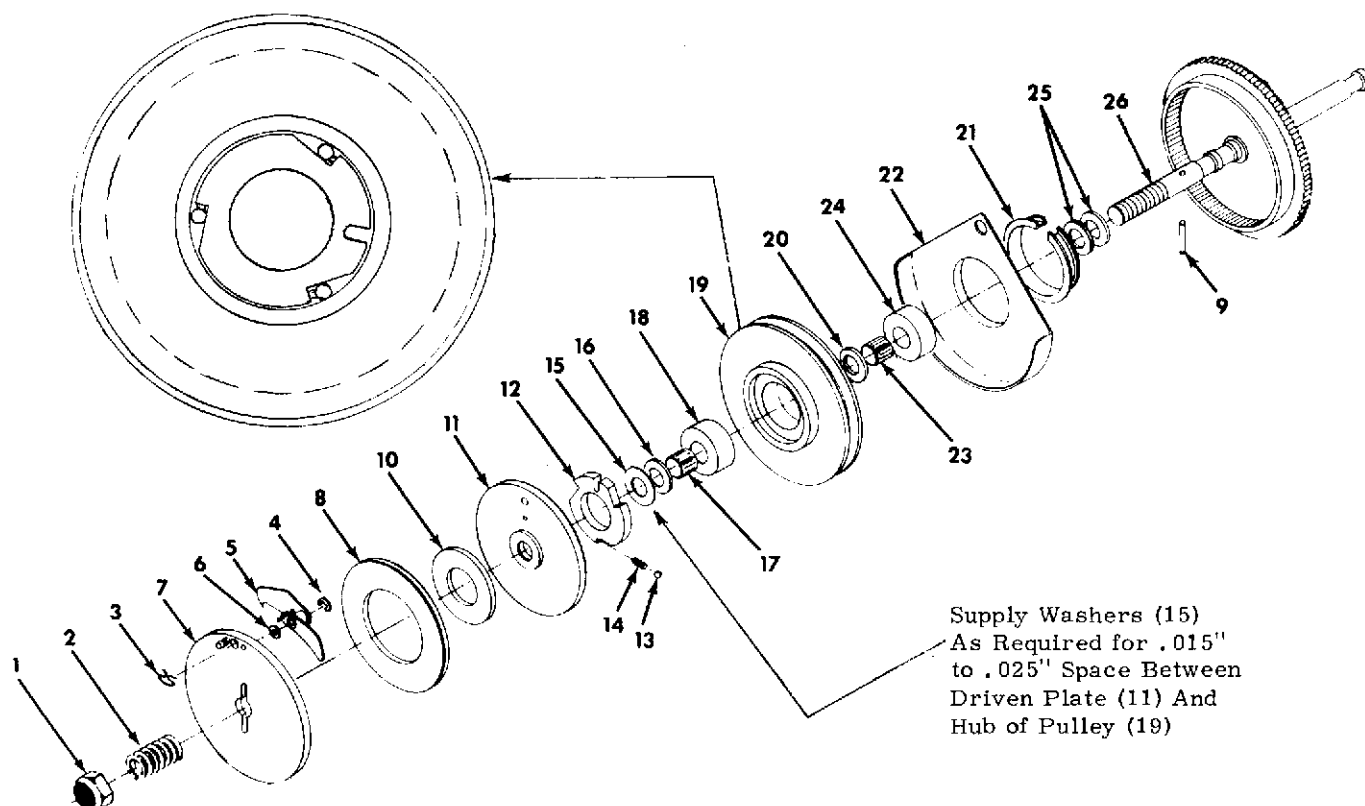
DISASSEMBLY AND REASSEMBLY OF FILM FEED CLUTCH ASSEMBLY
